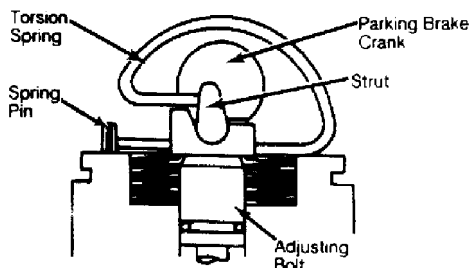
Proper Installation of Conical Spring and Adjusting Bolt
